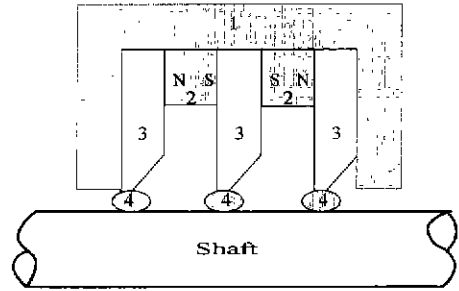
A cross-section of oil seal with pole-piece and Nd-permanent magnet. 1. Housing (18%Cr-8%Ni stainless steel) 2. Nd-permanent magnet 3. Pole-piece (Mild steel) 4. Magnetic fluid.
